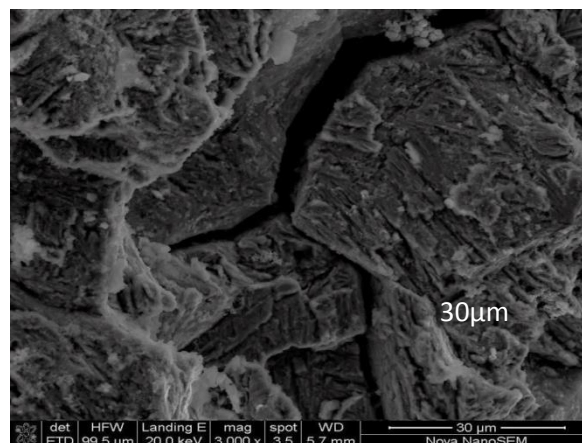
Fracture surface of 550°C temper U-bend specimen cracked in 3.5% NaCl, showing clear grain boundary separation
